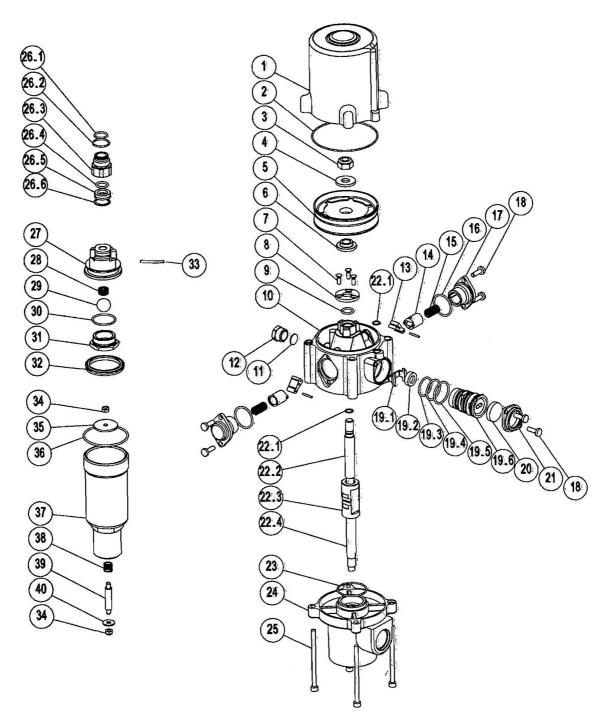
Exploded View of the Pneumatic Oil Pump
